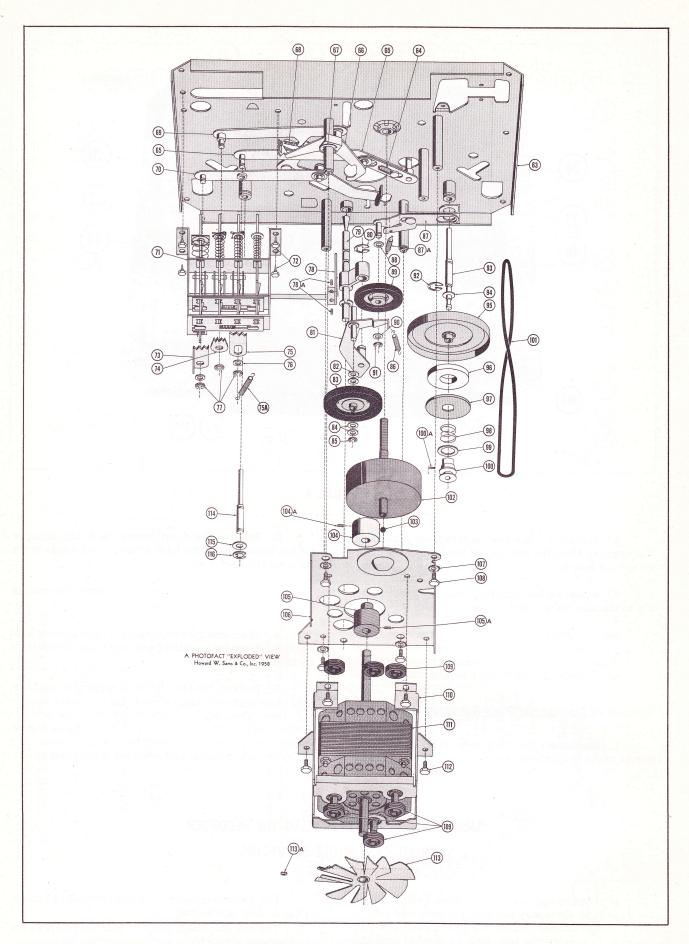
B. EXPLODED VIEW OF PARTS BELOW MECHANISM PLATE.
